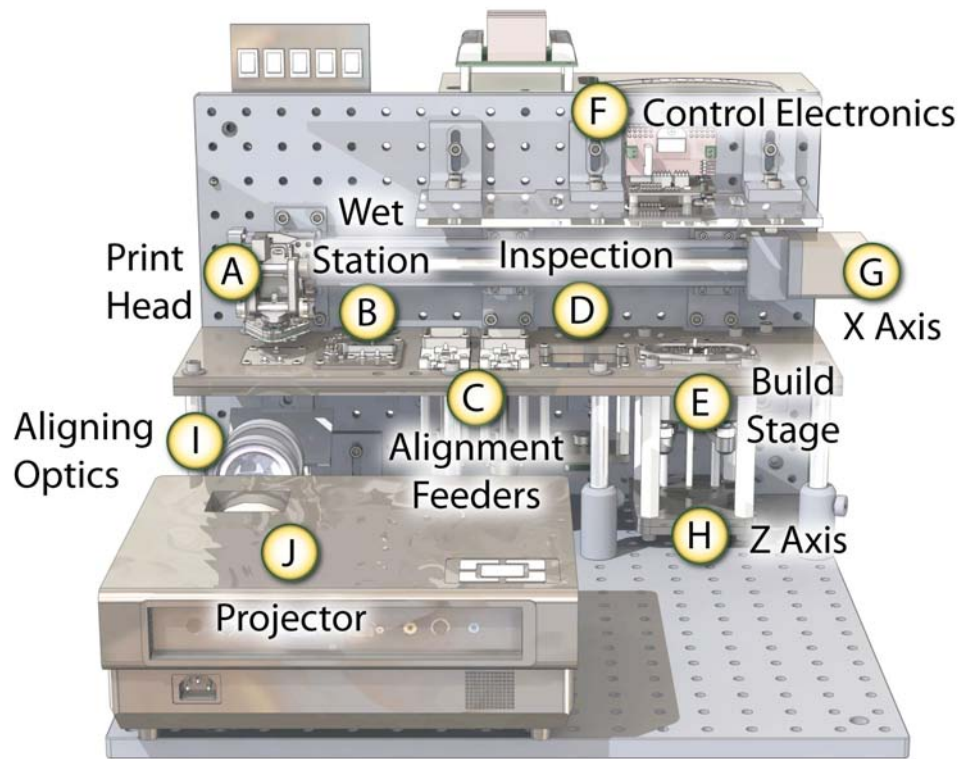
A schematic diagram of the parallel rapid assembler shows all major components. The print head (A) moves back and forth on the X axis of motion (G). A projector (J) shining through focusing optics (I) dries the print head selectively. A wet station (B) allows the entire head to be wetted while alignment feeders (C) align and hold layers of voxels for pickup. After an inspection station (D) each layer is deposited on the build stage (E) which moves along the Z axis of motion (H). Control electronics (F) direct the entire process.
